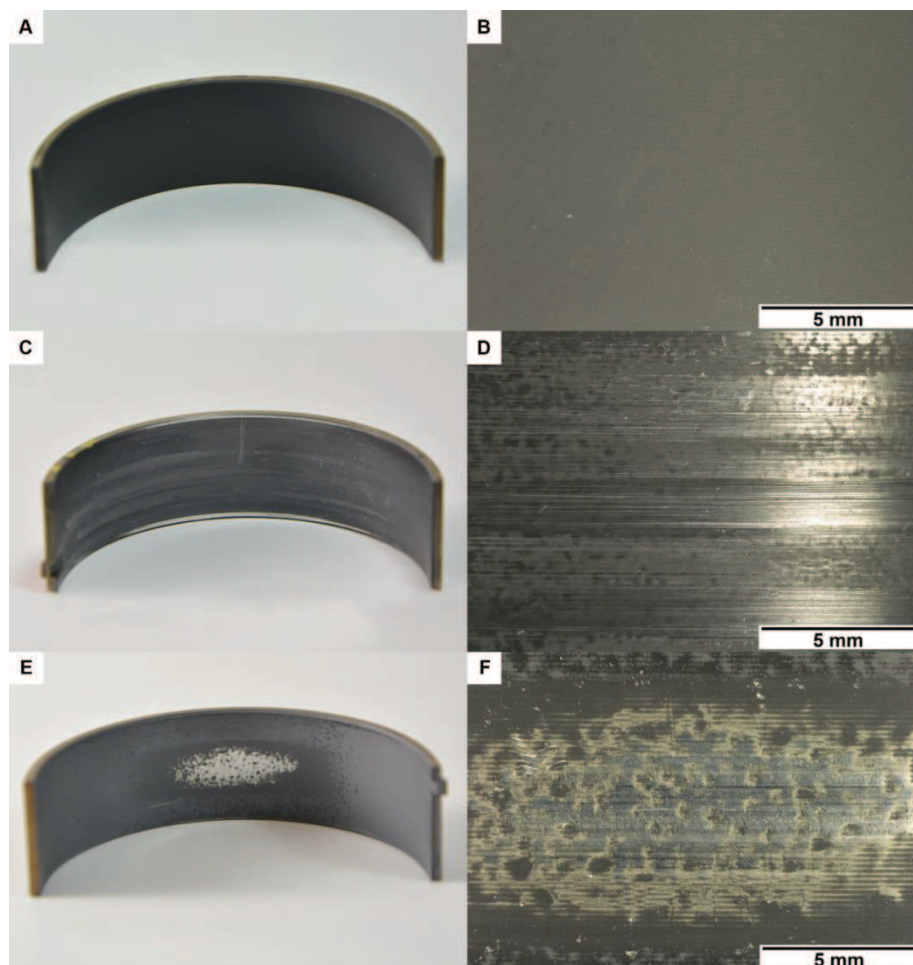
Appearance (A) and stereomicroscopic image (B) of a newly produced engine bearing. Appearance (C) and stereomicroscopic image (D) of the loaded bearing half shell
